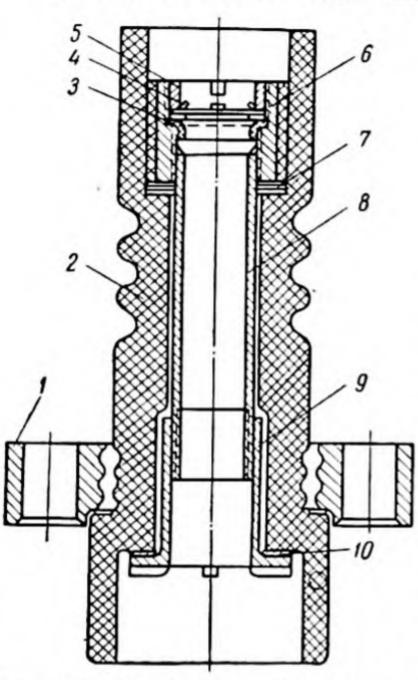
Bushing insulator of the MΓΓ-229 circuit breaker:
